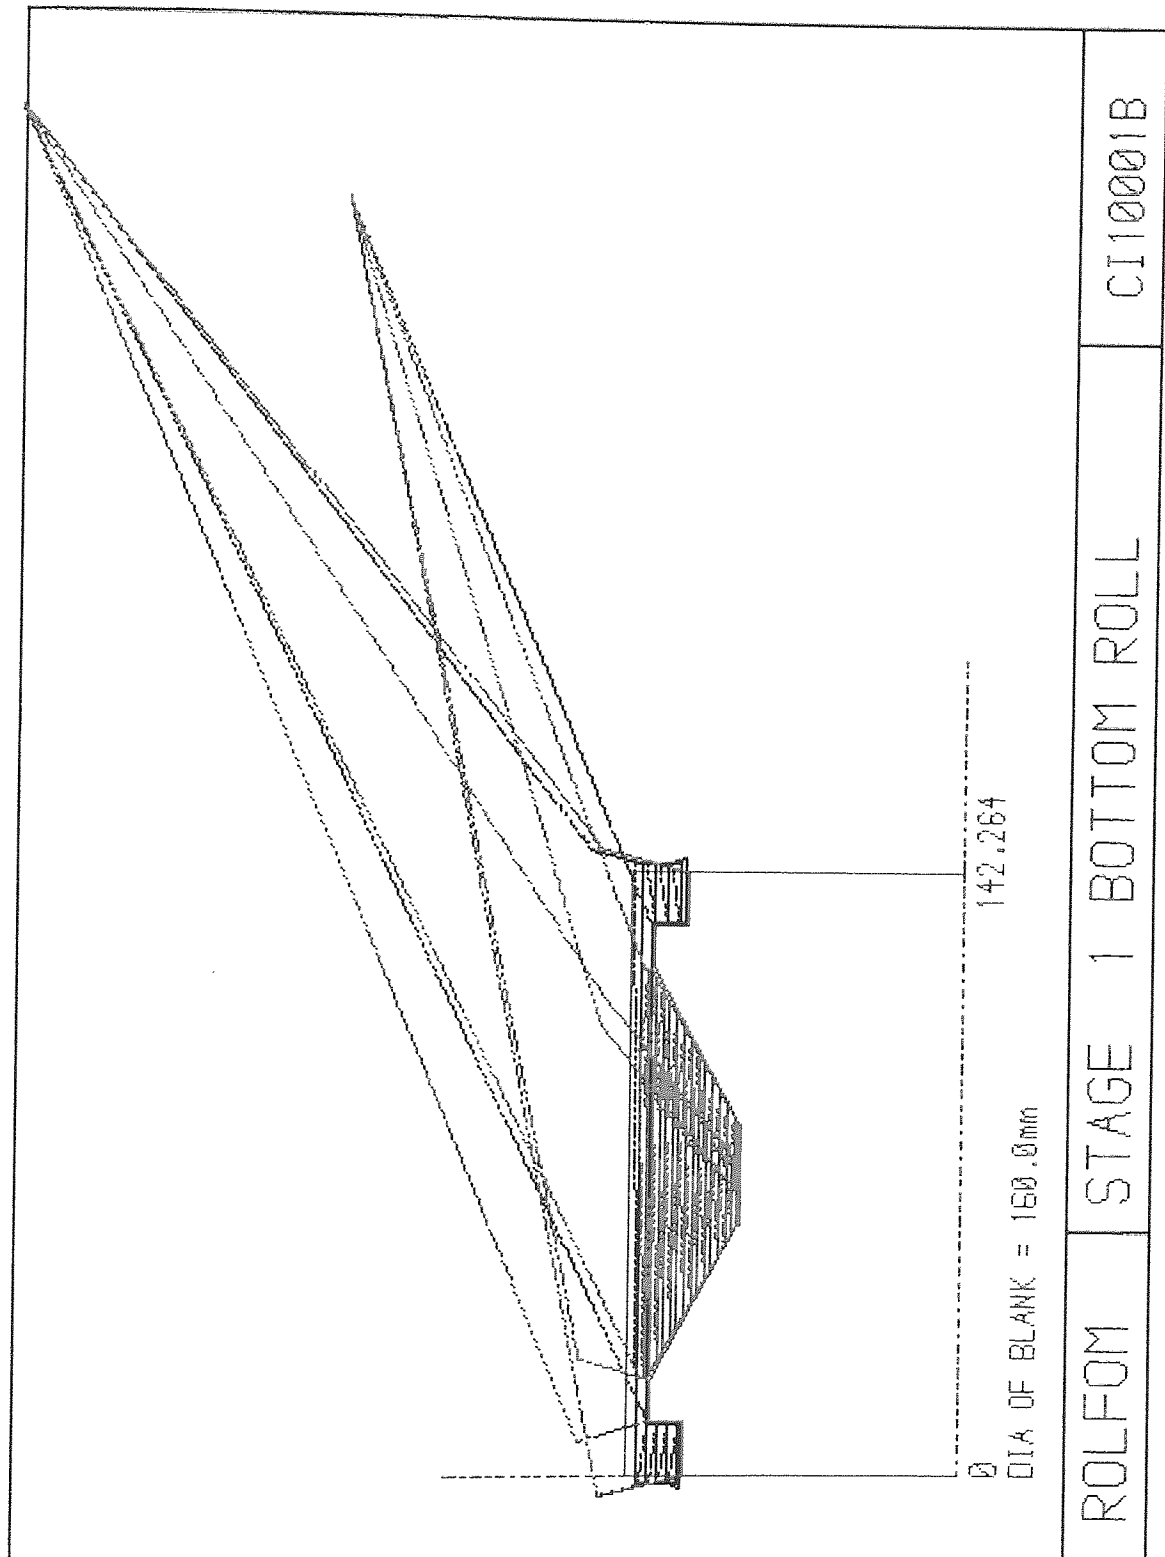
A CUTTER TOOL PATH PLOT (b) BOTTOM ROLL
